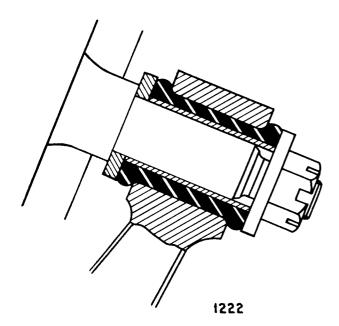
Section through one of the lower wishbone rubber steel mounting bushes.
